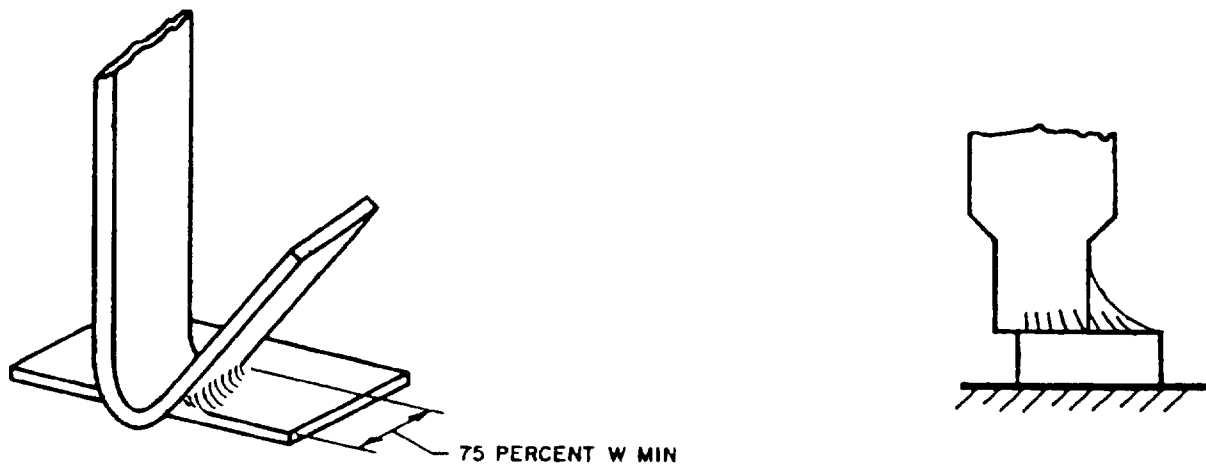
J-lead and V-lead solder fillet (see 4.23.7.7).
